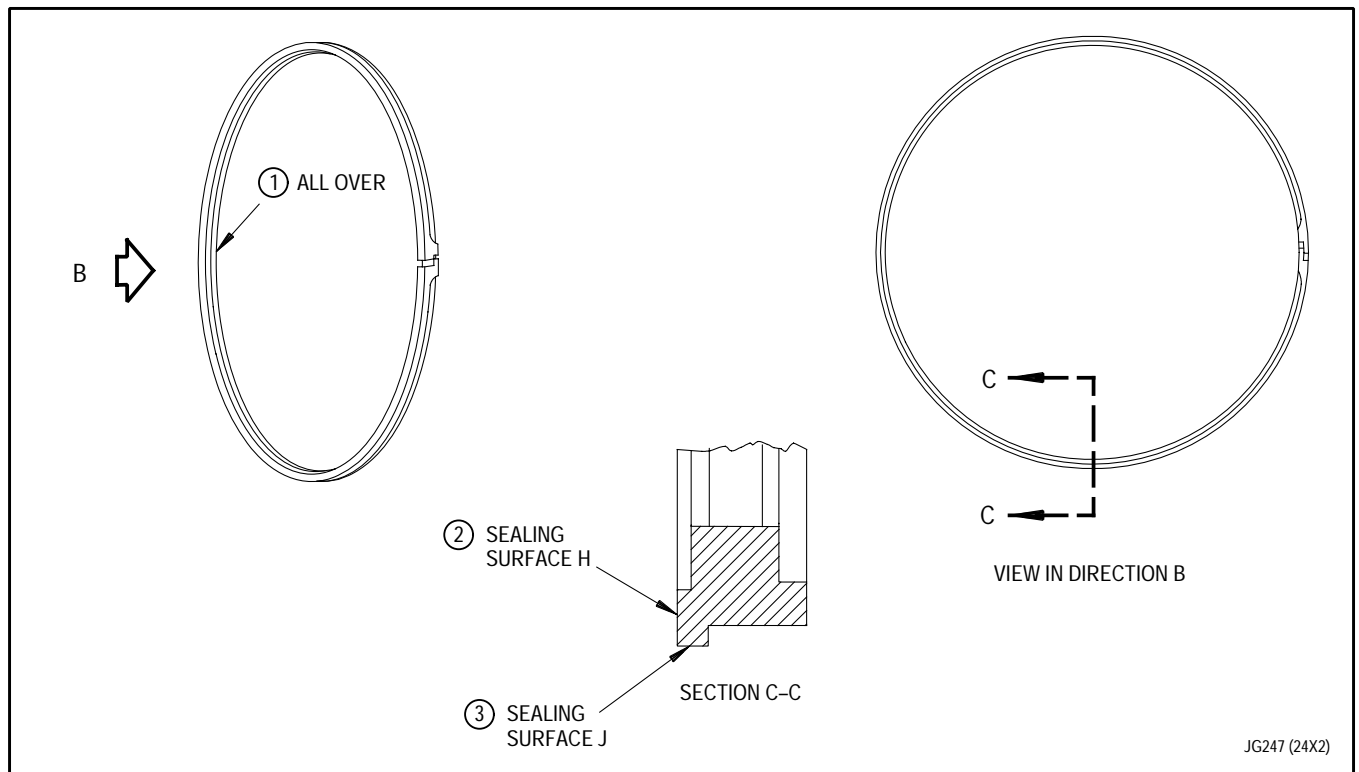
Metal Seal Ring (No. 3 Bearing Seal Sealing Ring) - Inspection
